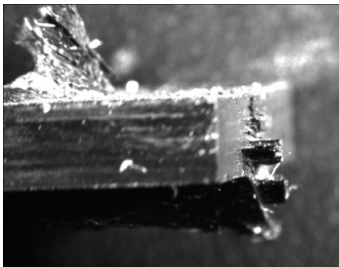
Shear-out of longitudinal plies in traditional hard single-shear bearing specimen
